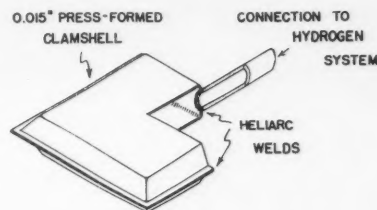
Sketch of clamshell permeability specimen showing method of welding to connection tube.
